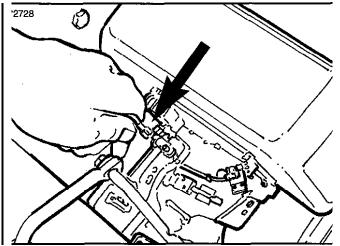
Pull Off Safety Interlock Wire At Spade Terminal
